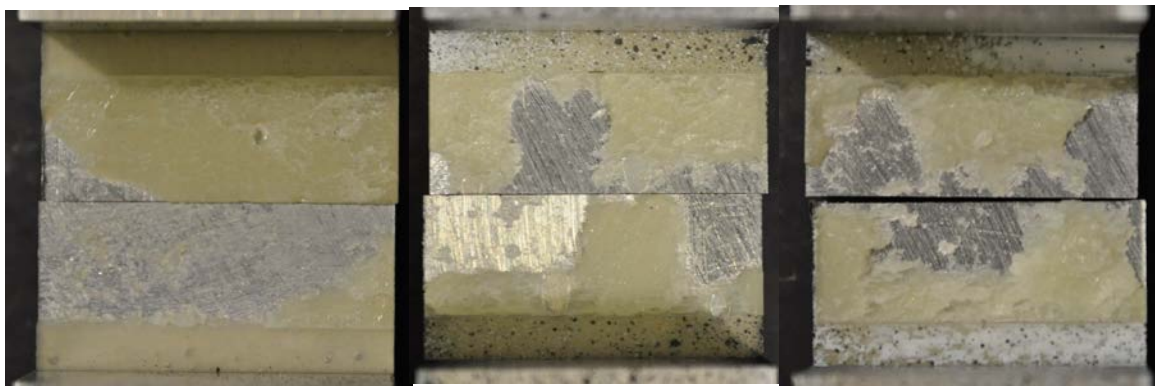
WestSix10 ASTM D5656 thick adhesive shear failure surfaces.
